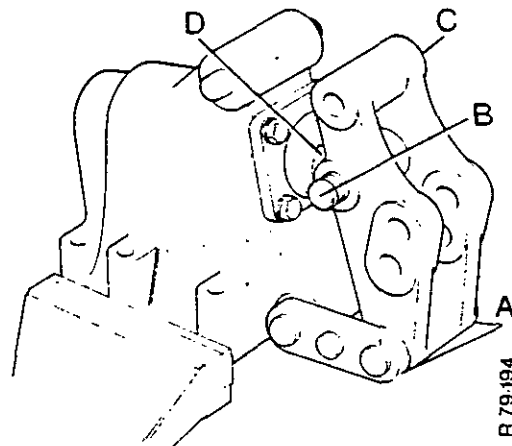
DISASSEMBLY OF THE ADJUSTABLE SENSING UNIT
